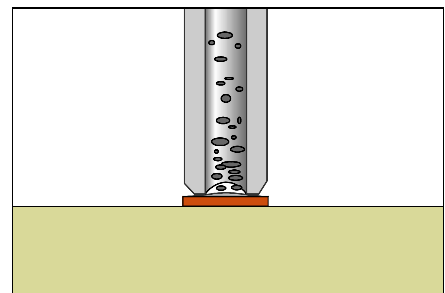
Remove excess solder from surface mount pads using a vacuum desoldering tool.
